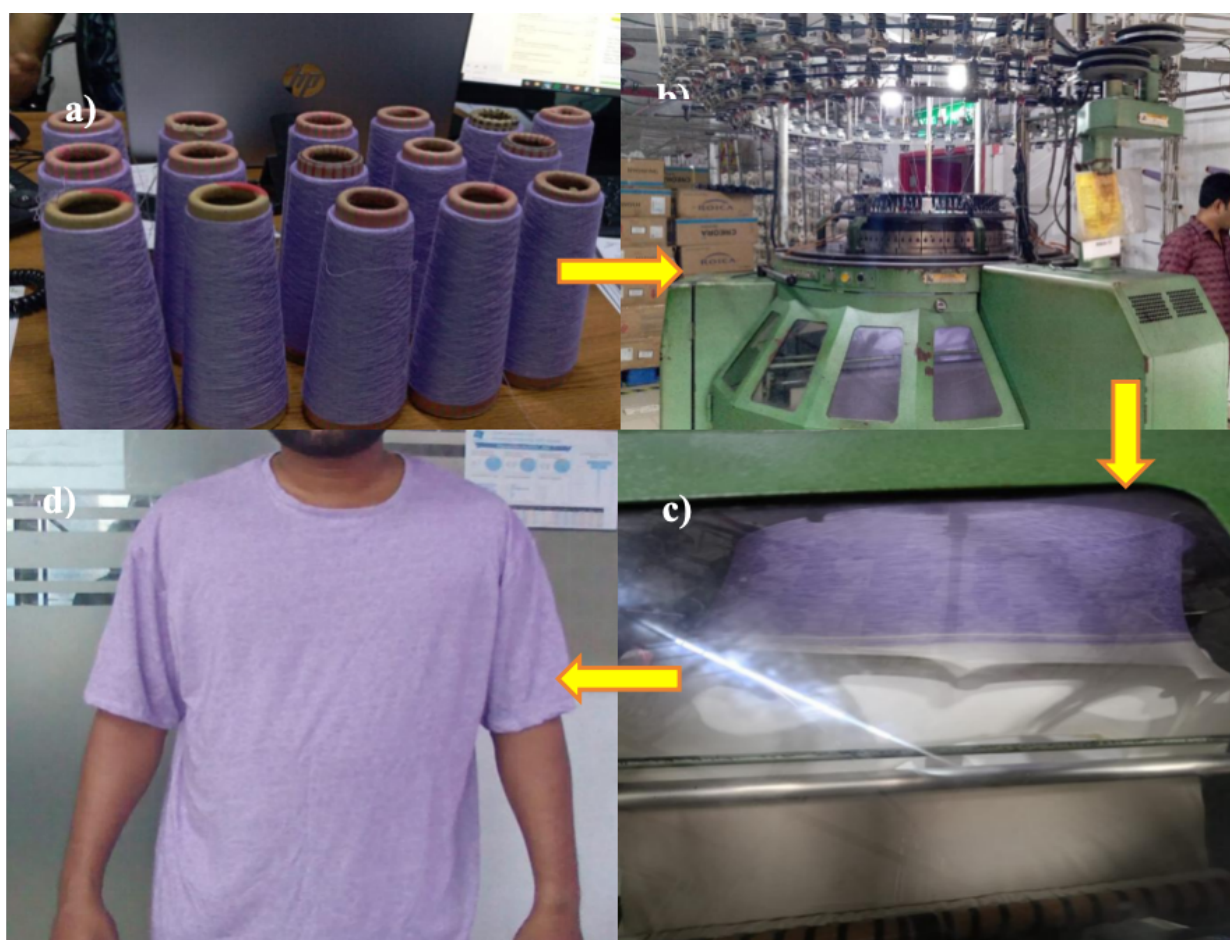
yarn packages of tri-blend yarn produced for knitting; (b) production of knit fabric in commercial circular knitting machine; (c) knit fabric; (d) T-shirt produced from fabric.
